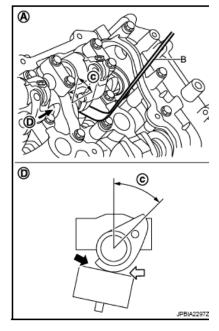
Checking Position Of Drive Shaft Nose Courtesy of NISSAN MOTOR CO., U.S.A.
